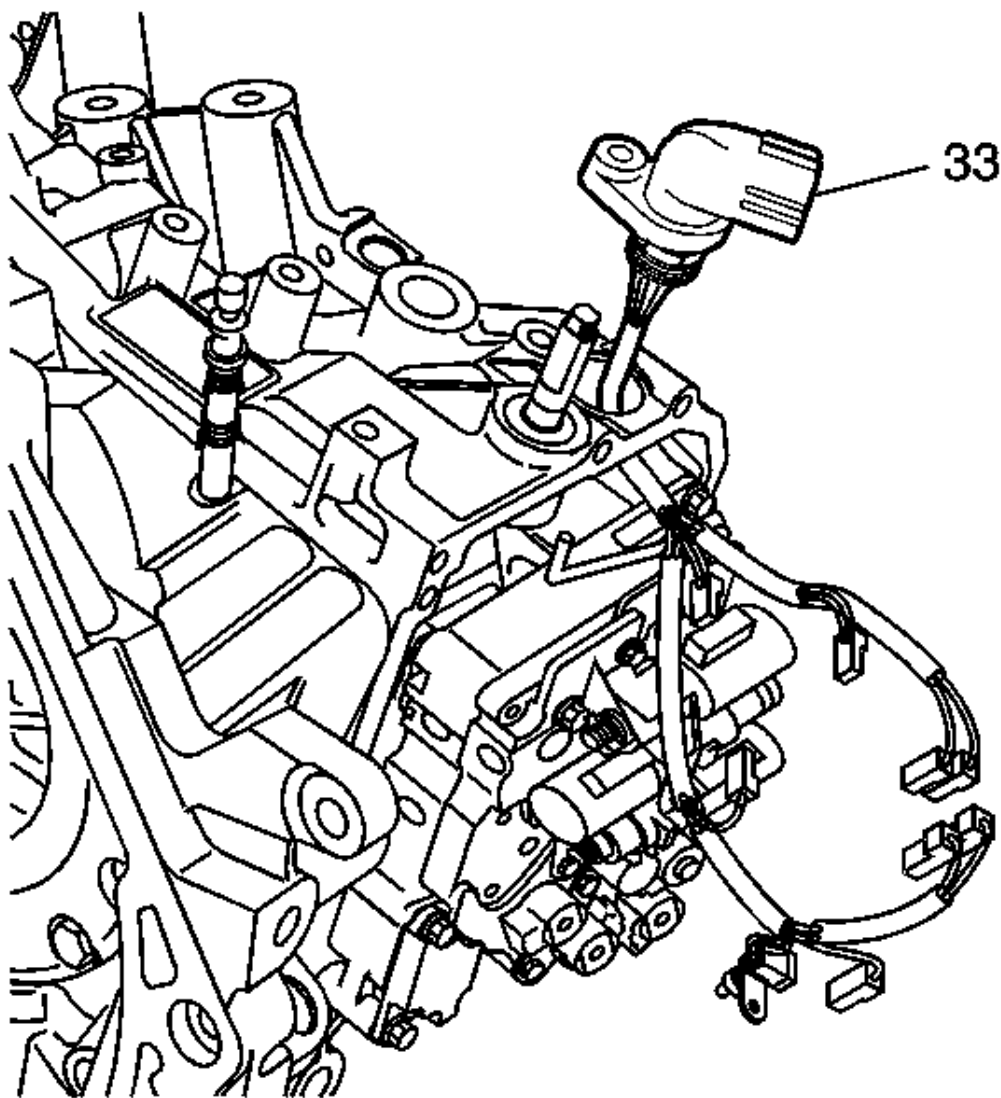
Identifying Control Solenoid Valve Assembly Filter Plate
